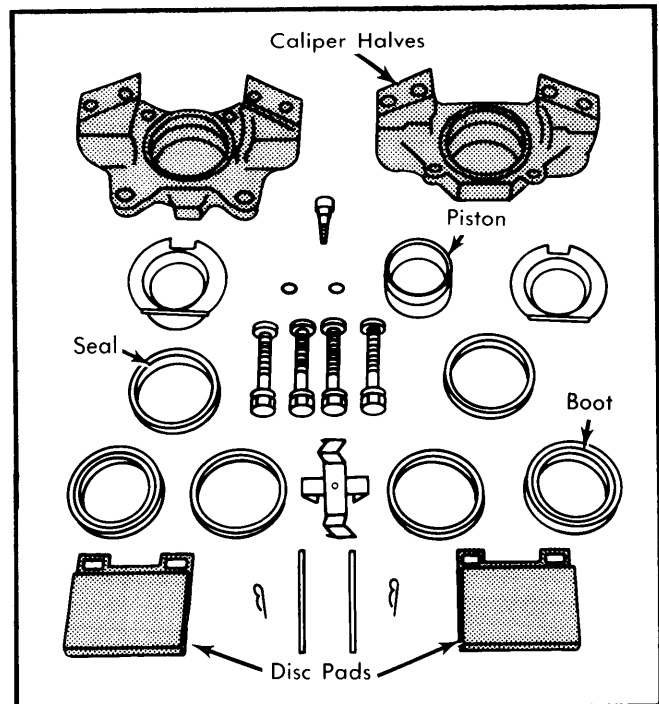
Disassembled View of Typical Mercedes-Benz Brake Caliper
